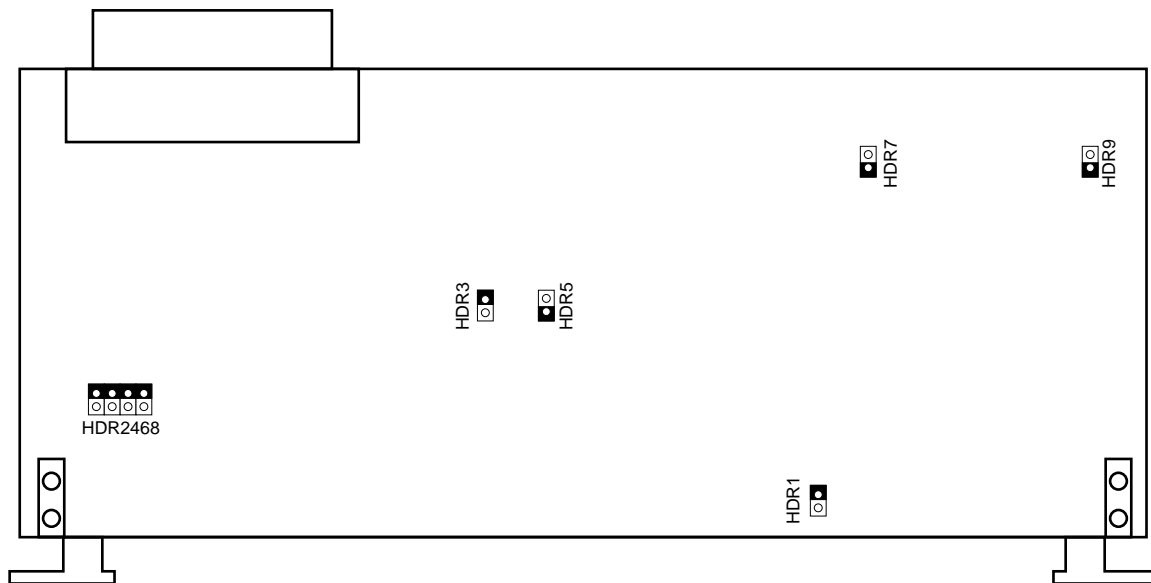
Jumper Positions on CMC5B I/O Board
